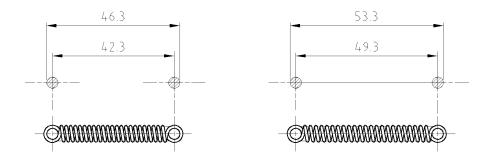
Grips' jaw faces springs minimum (left) and maximum (right) extension.
